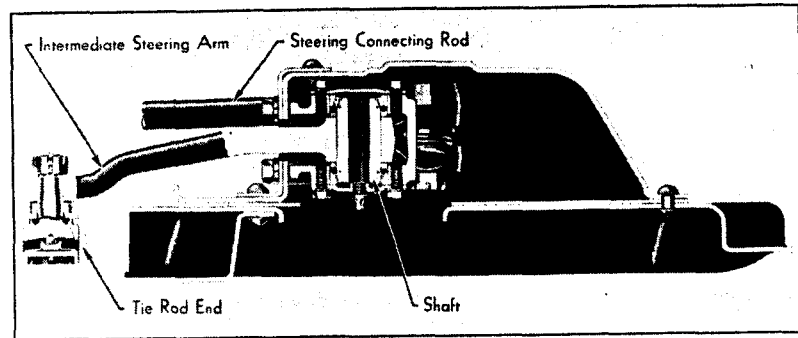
Sectional view of the intermediate steering arm assembly viewed from the right side
